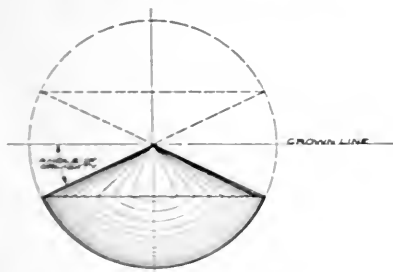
BASE SURFACE OF THE INVOLUTE CROWN GEAR
